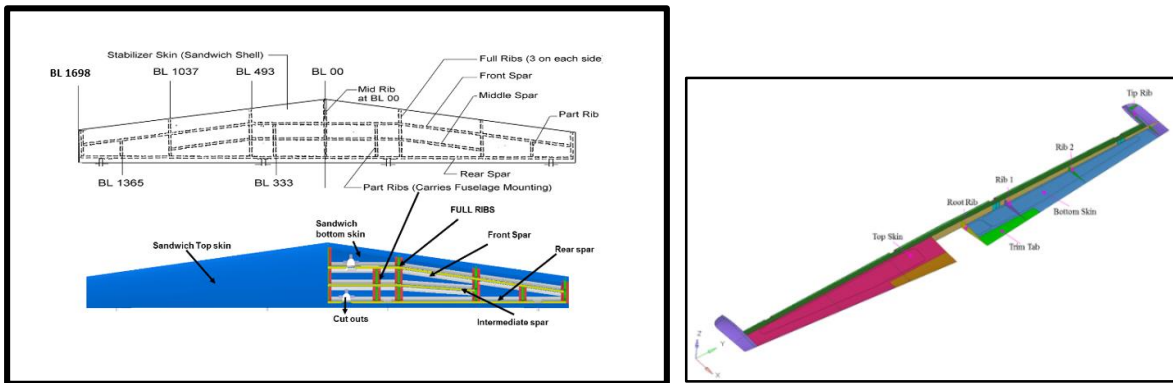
Schematic of Horizontal Stabilizer& Elevator
